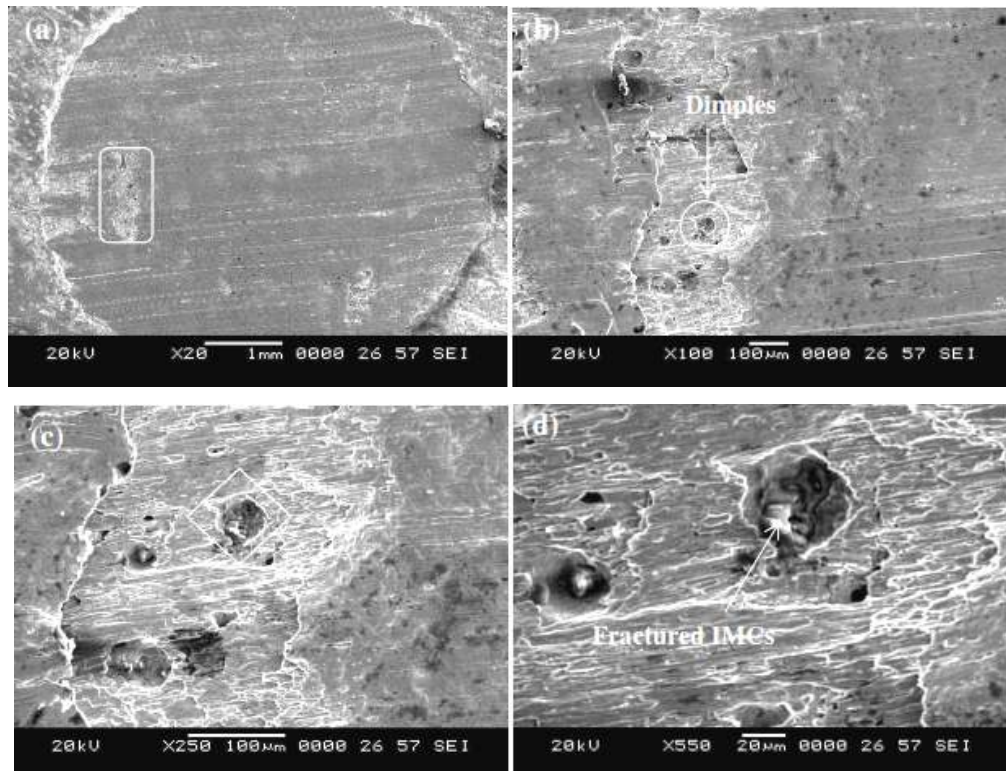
SEM micrographs of the fractured surfaces of Sn-0.7Cu solder on rough Fe-Ni substrate surface (a), (b) lower magnification (c), (d) higher magnification
